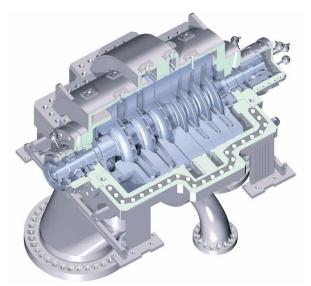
SIEMENS single shaft compressor STC-SH (source: SIEMENS Corp.).
